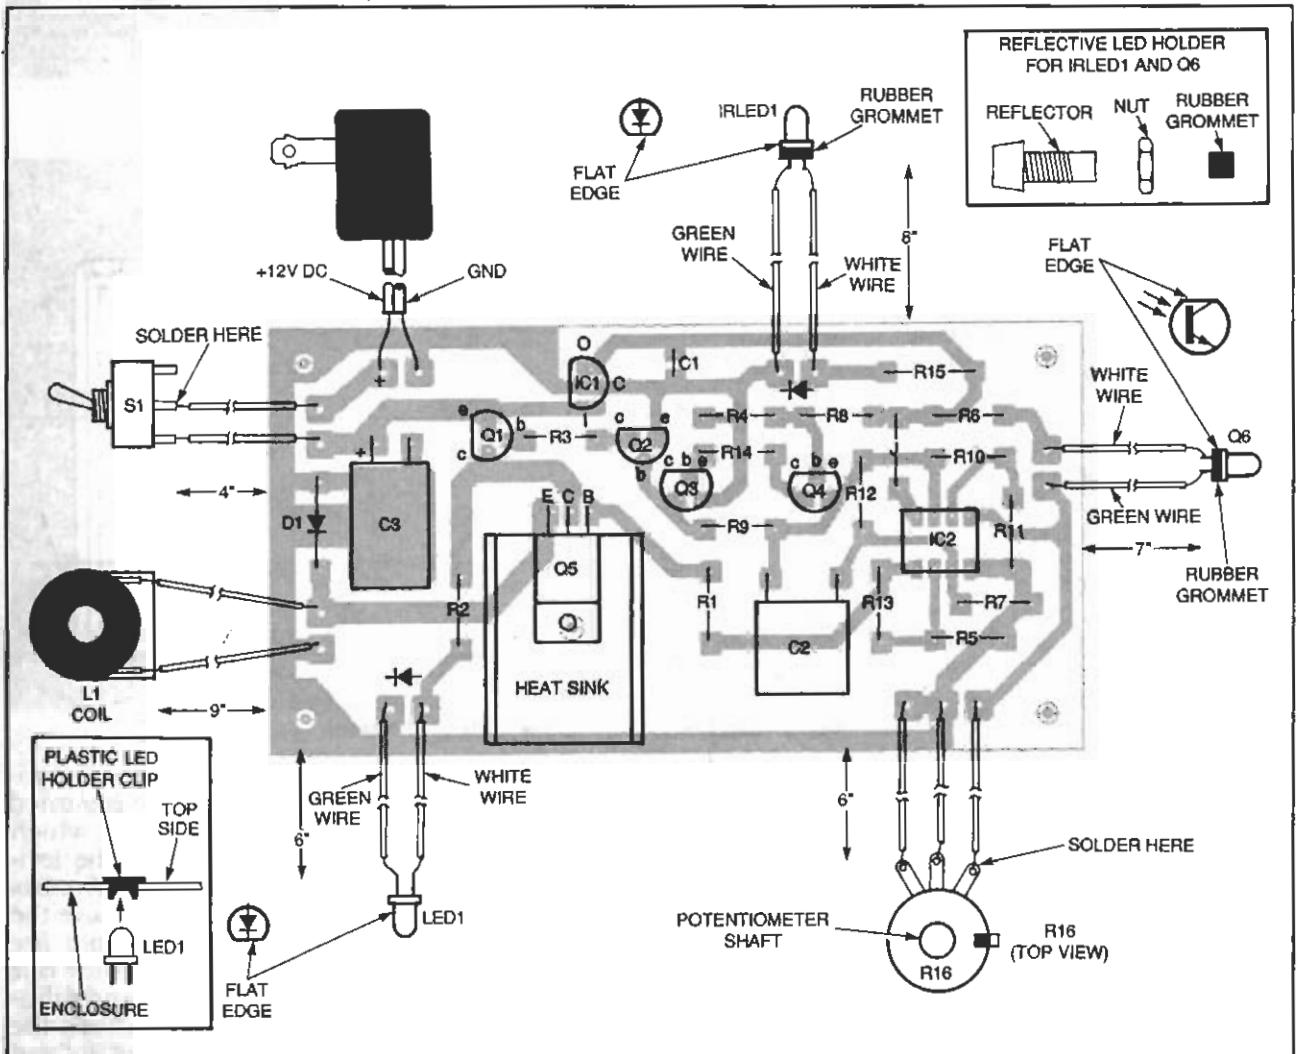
PARTS-PLACEMENT DIAGRAM and wiring details for off-board components.
